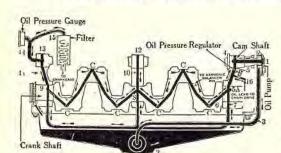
Example of a force-feed lubrication system showing drilled crankshaft. Oil is supplied from oil pump, through distributing pipes to crankshaft main bearings, connecting-rod bearings, and camshaft bearings. Oil is delivered under pressure to all bearings in the engine except the piston-pin bearings. (Oldsmobile six, series E). Oil pump is a gear type and is elevated.
